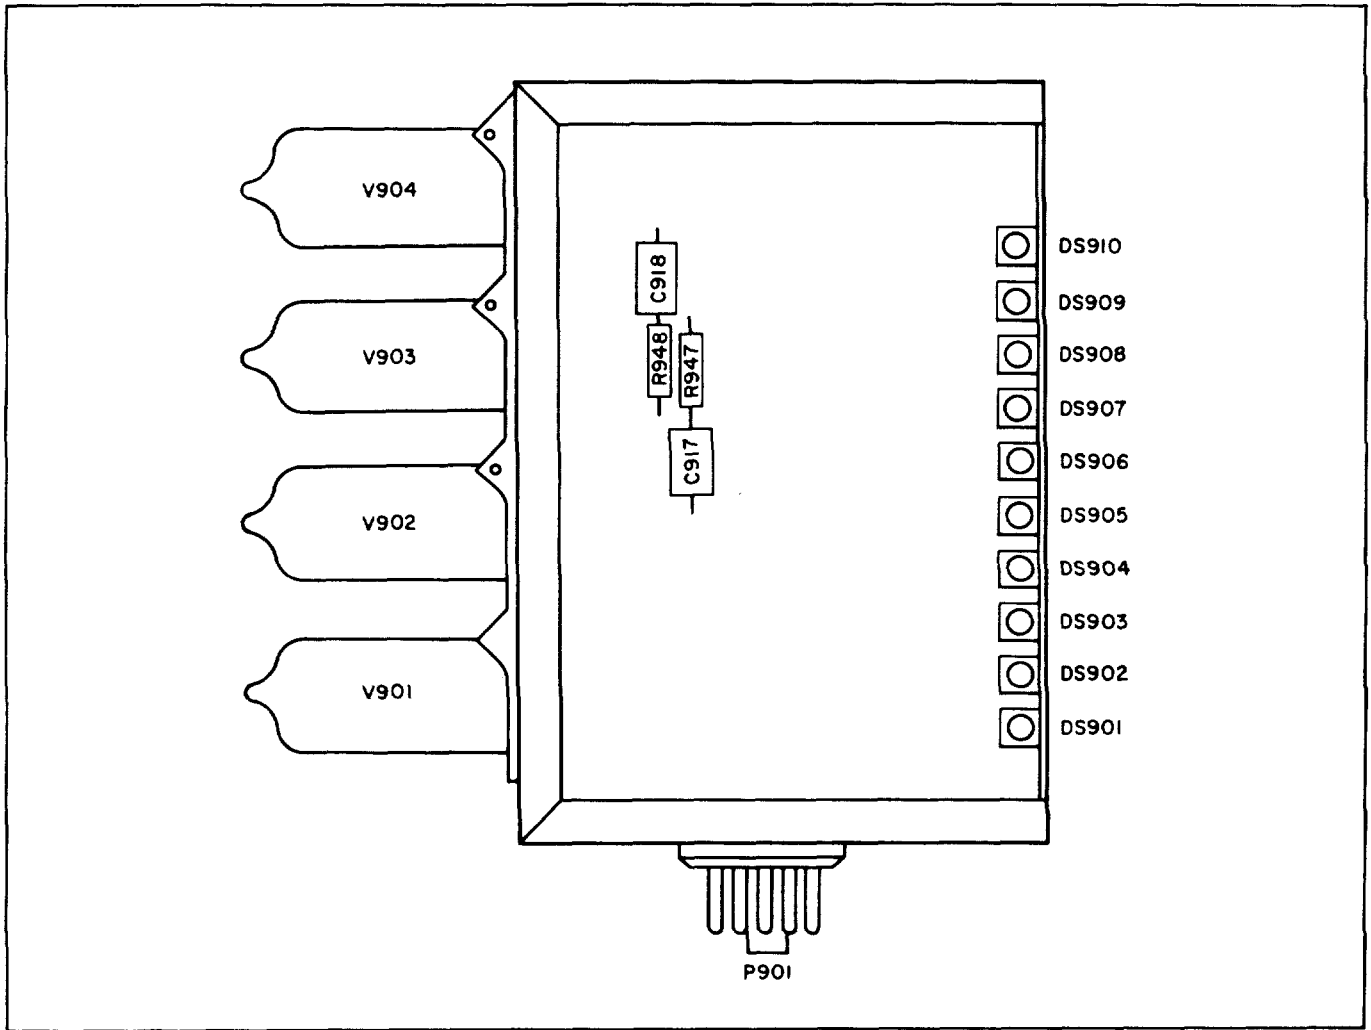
Left Side View of AC-4A Digital Display Indicator Showing Component Layout on Printed Circuit Board
